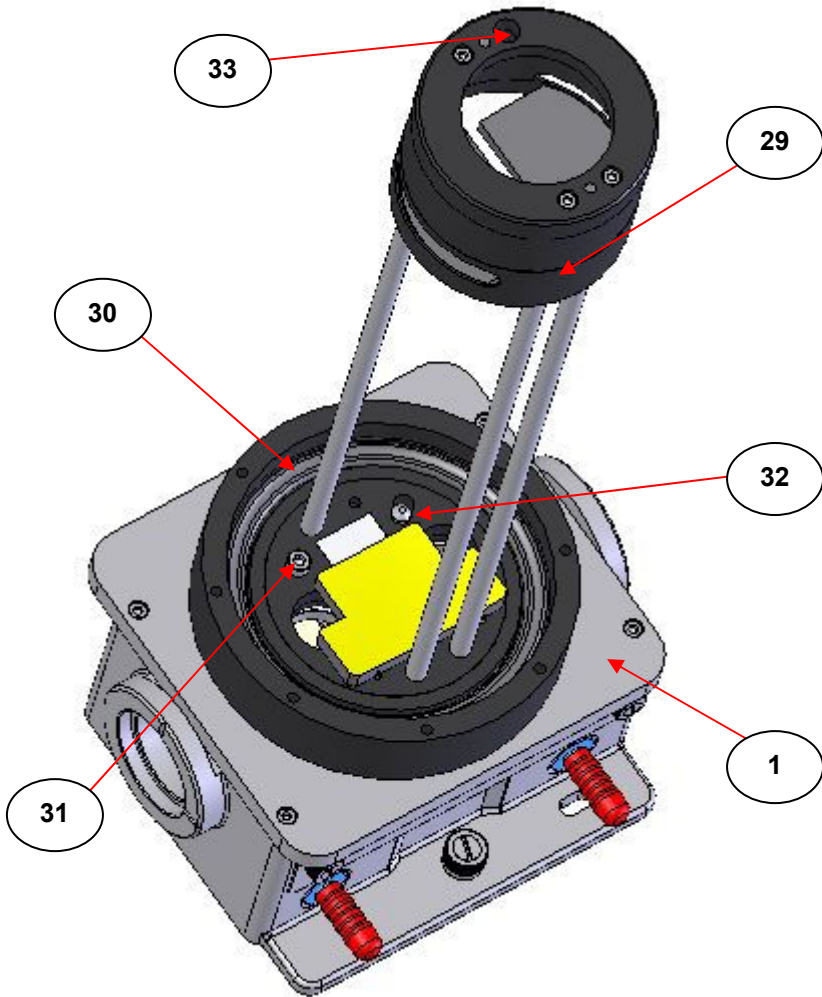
Tornado™ T5 Outer Cylinder Assembly Removed From Optical Unit and Mirror Carriage Assembly
